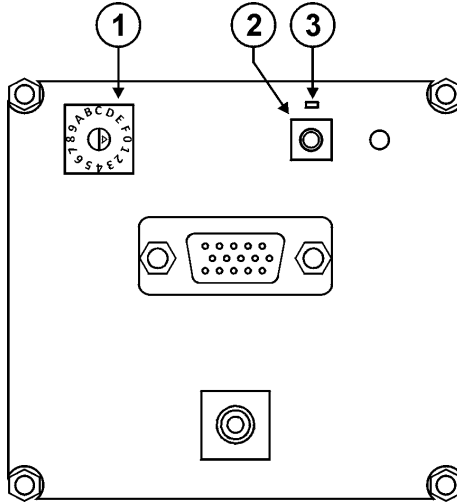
WP-121 PCB Assembly Front View with Face Plate Removed
